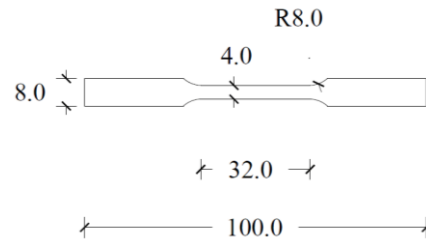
Dimensions of coupons that are to be cut using a waterjet in millimeters.
